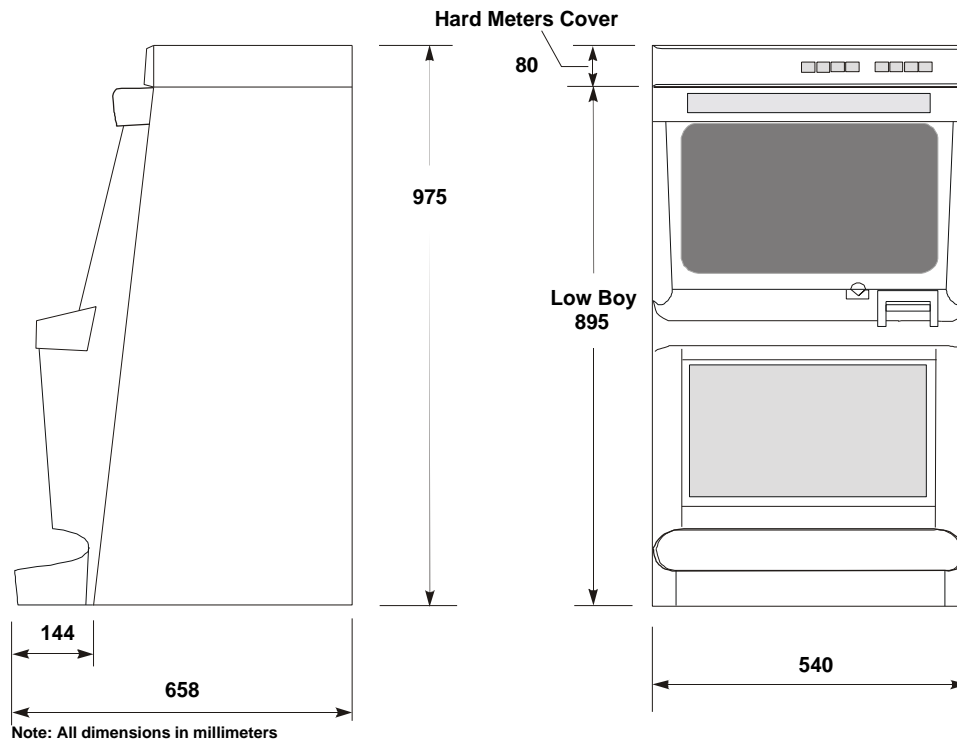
Machine Dimensions - Low Boy with Hard Meters
